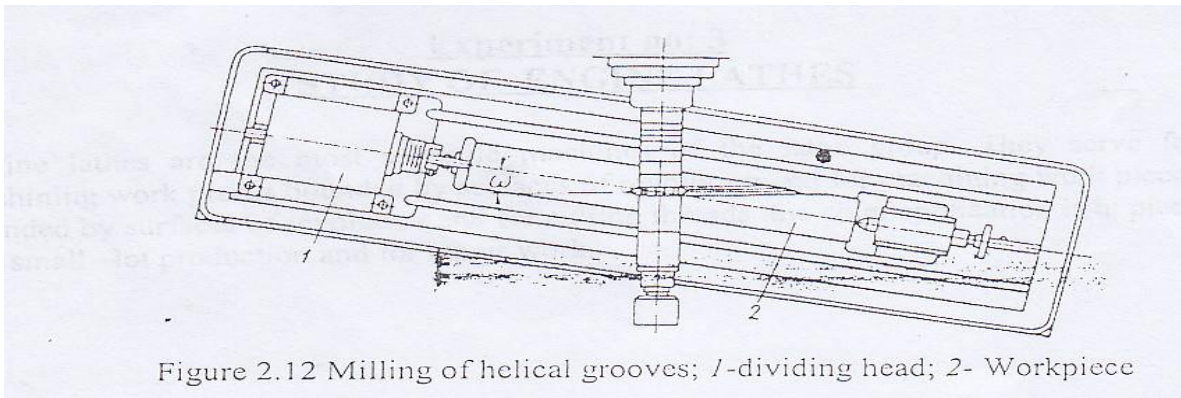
Milling of helical grooves; 1-dividing head; 2- Workpiece
